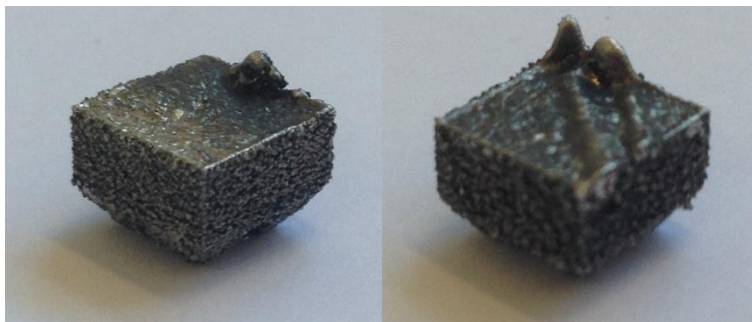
Build defects on sample 45 (left) and sample 6 (right) from test A5: AA6061, 25 μm layer thickness CCD
